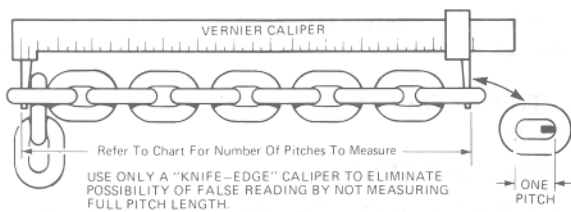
Checking Coil Chain Using Vernier Caliper.
